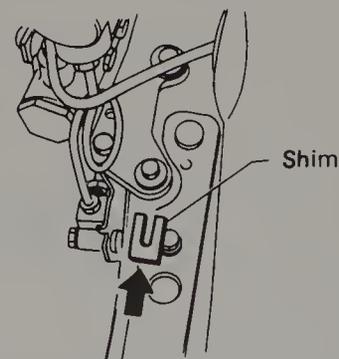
Location of the Hill-holder adjustment shim placement (Sec 21)
